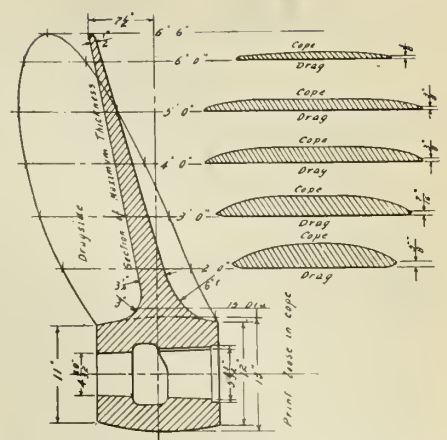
SHOWS THICKNESS AND SHAPE AT DIFFERENT PARTS OF BLADE.
